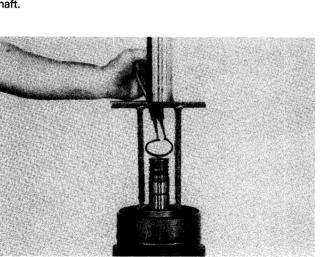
Compress return spring and install retainer ring being certain ring is in full position in retaining washer and ring groove.
